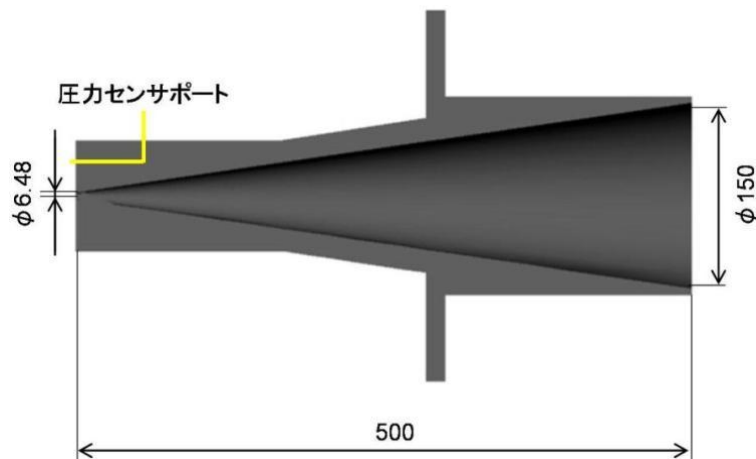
Drawing of Nozzle (Unit : mm)
